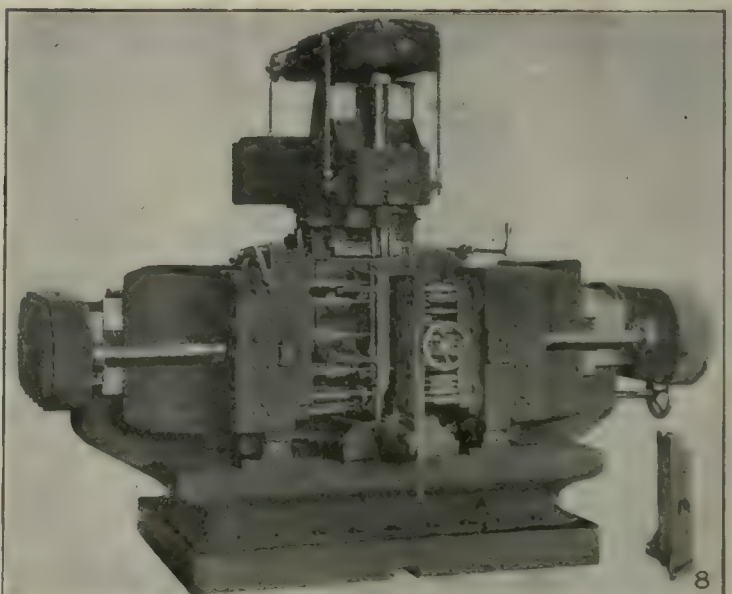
LATE MODEL OF THREE-WAY DRILLING MACHINE
